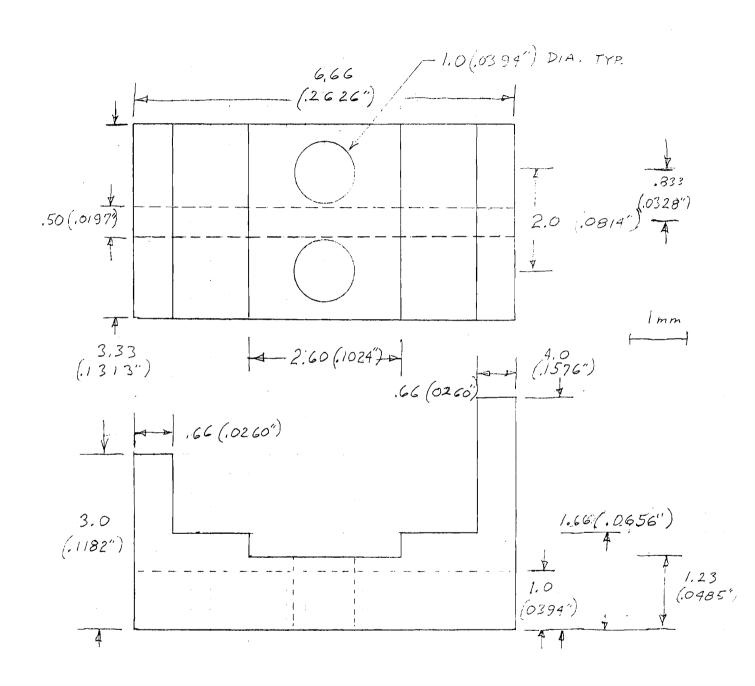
Optoswitch mount for angle encoder. (Dwg. GC230791-01)
